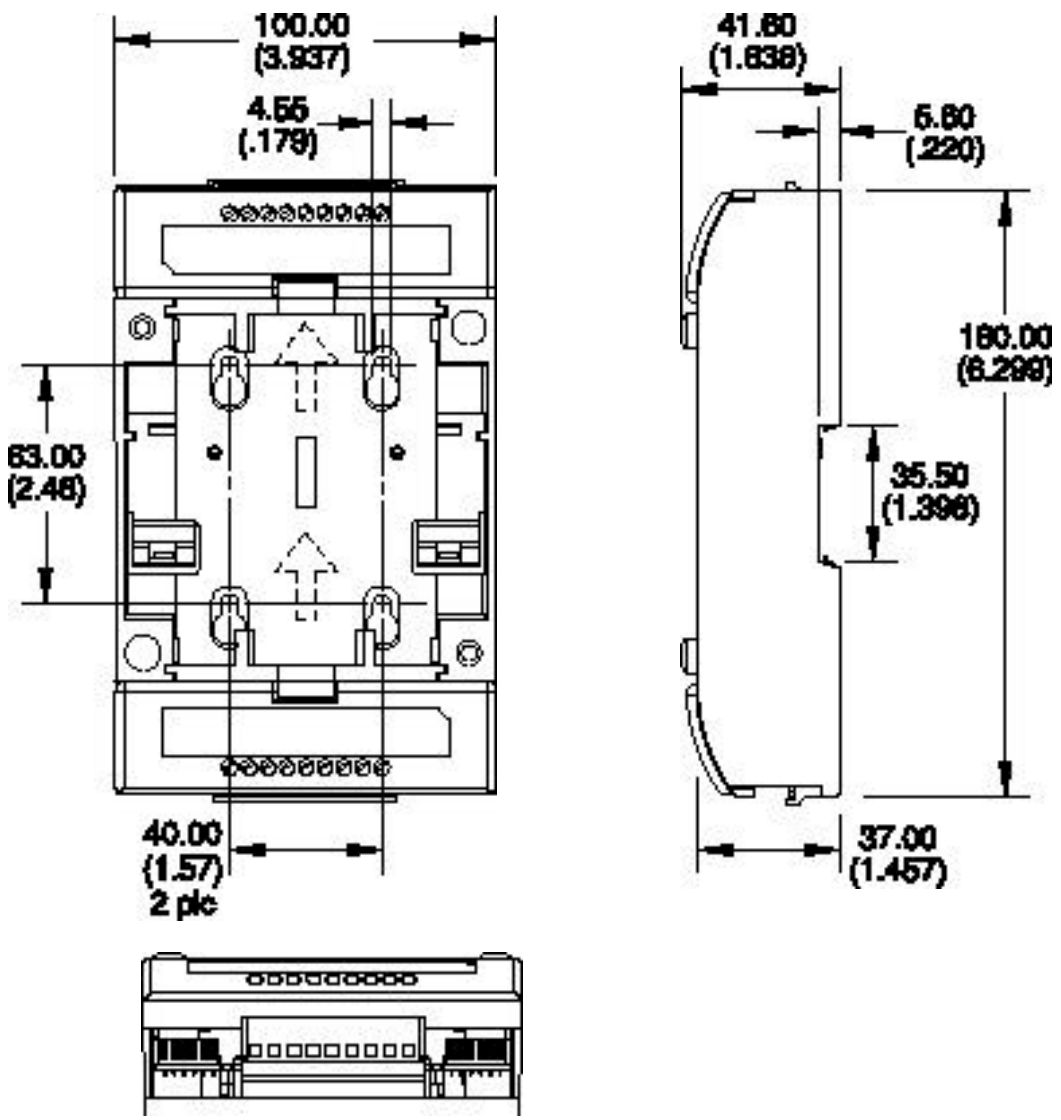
DIN Rail Base Plate Dimensions (Dimensions are in mm (inches).)
